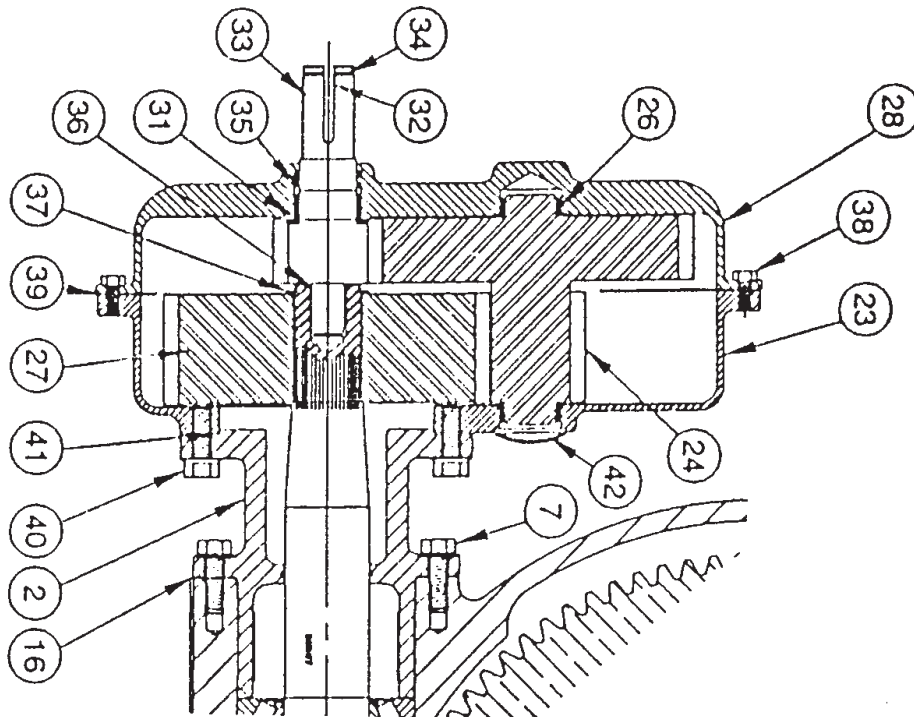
WG54 320:1 11.75" (DWG 83839 Rev. D)
